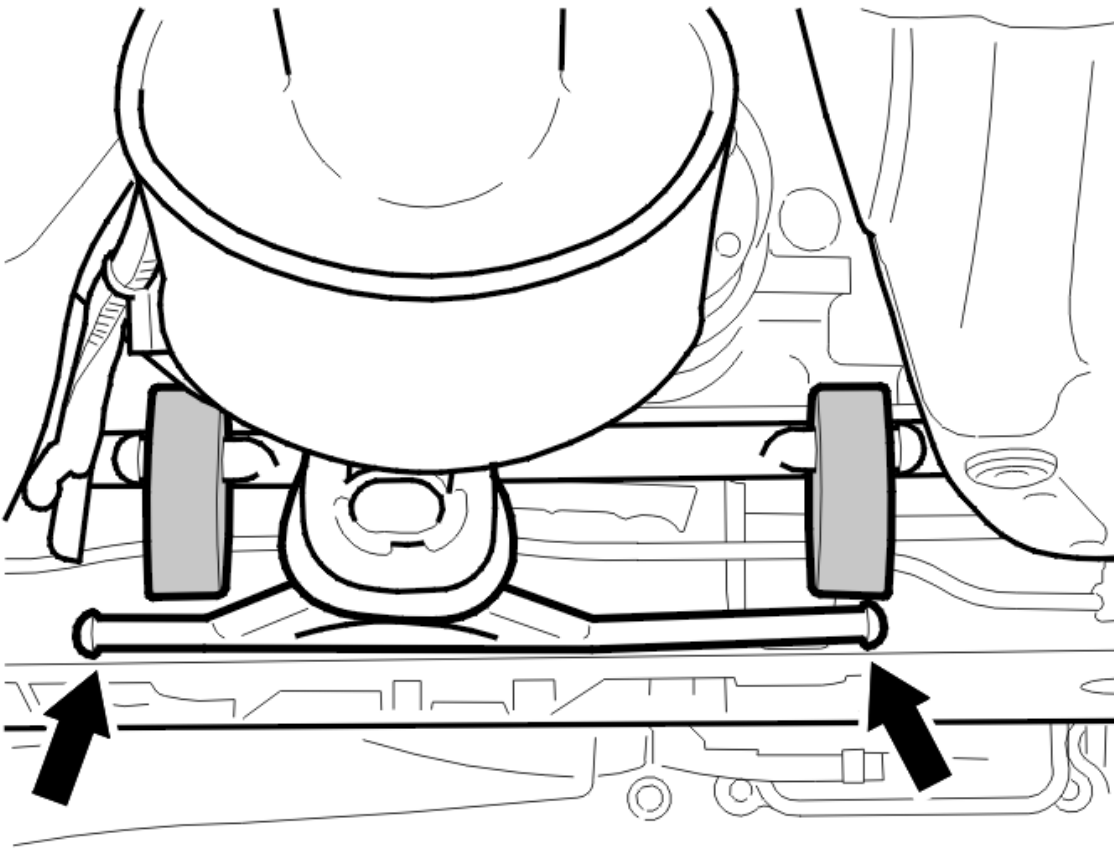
Identifying Exhaust Pipe Rubber Mountings
